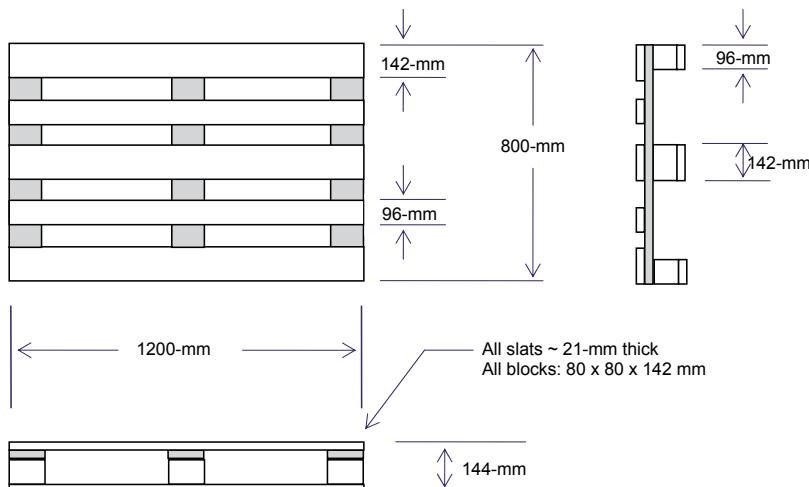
Typical dimensions of the standard EUR pallet
